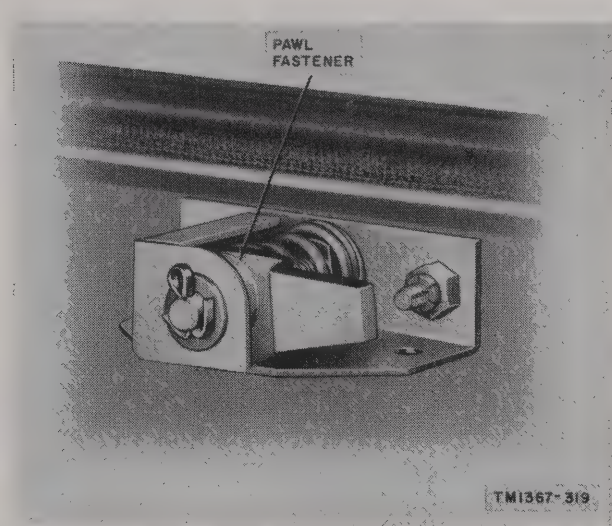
Cabinet pawl fastener, closeup of lubrication point.
